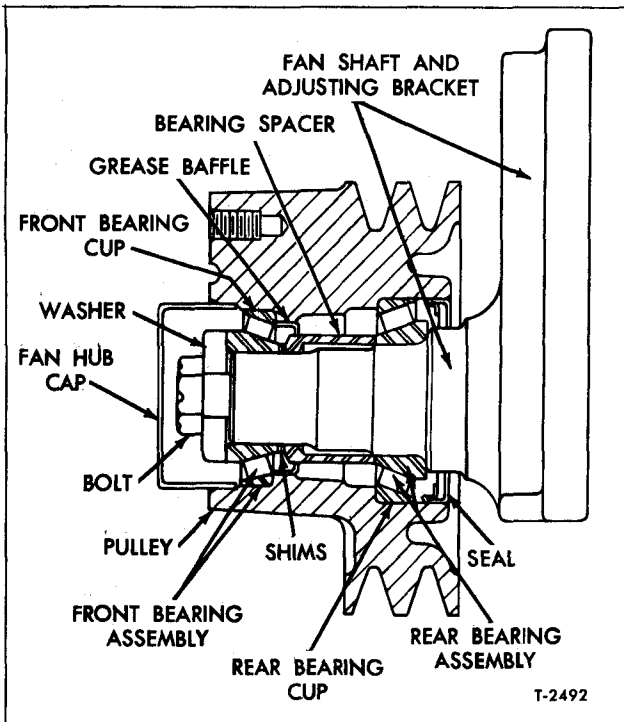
Separately Mounted Fan Support Assembly (6V-53 Engine)
